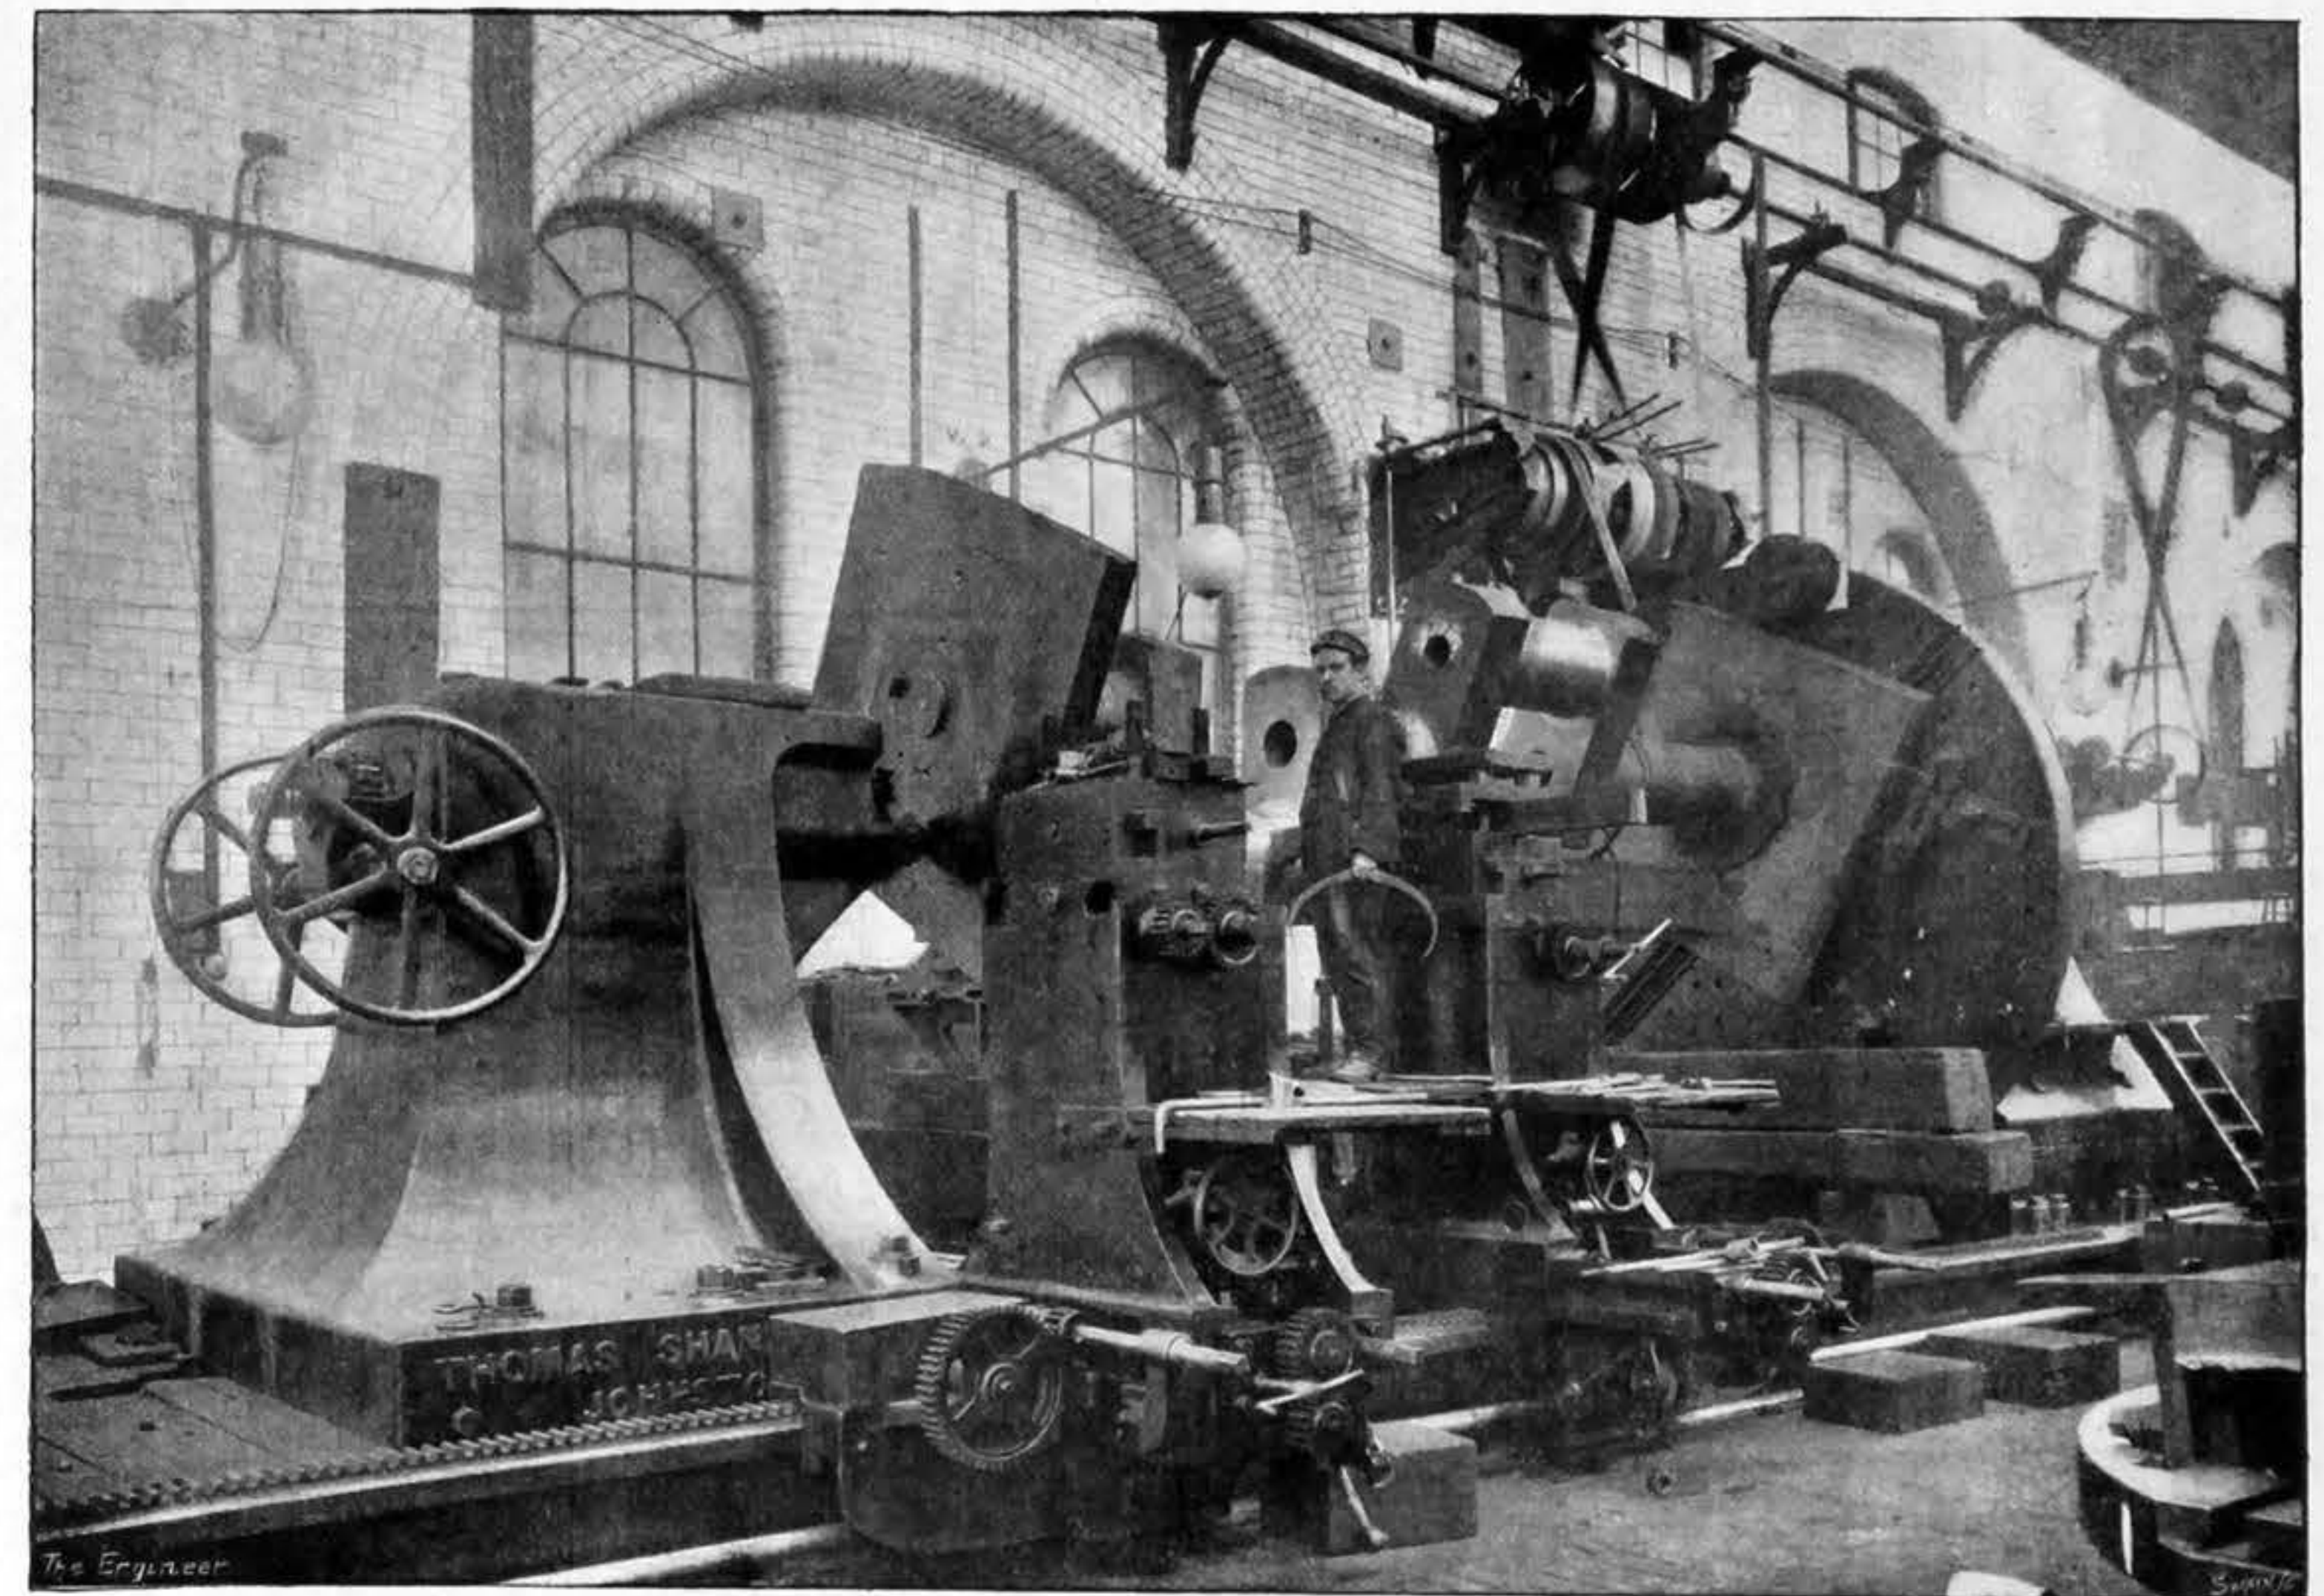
LATHE, 69in. CENTRES, WITH DOUBLE CRANK-SHAFT OF CHILIAN CRUISER MINISTERO LENTENO
